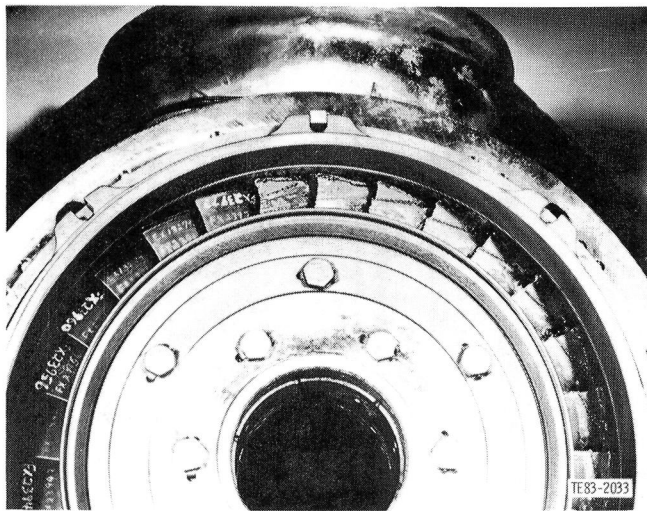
View of nozzle assembly after removal from thermal shock rig BU10.
